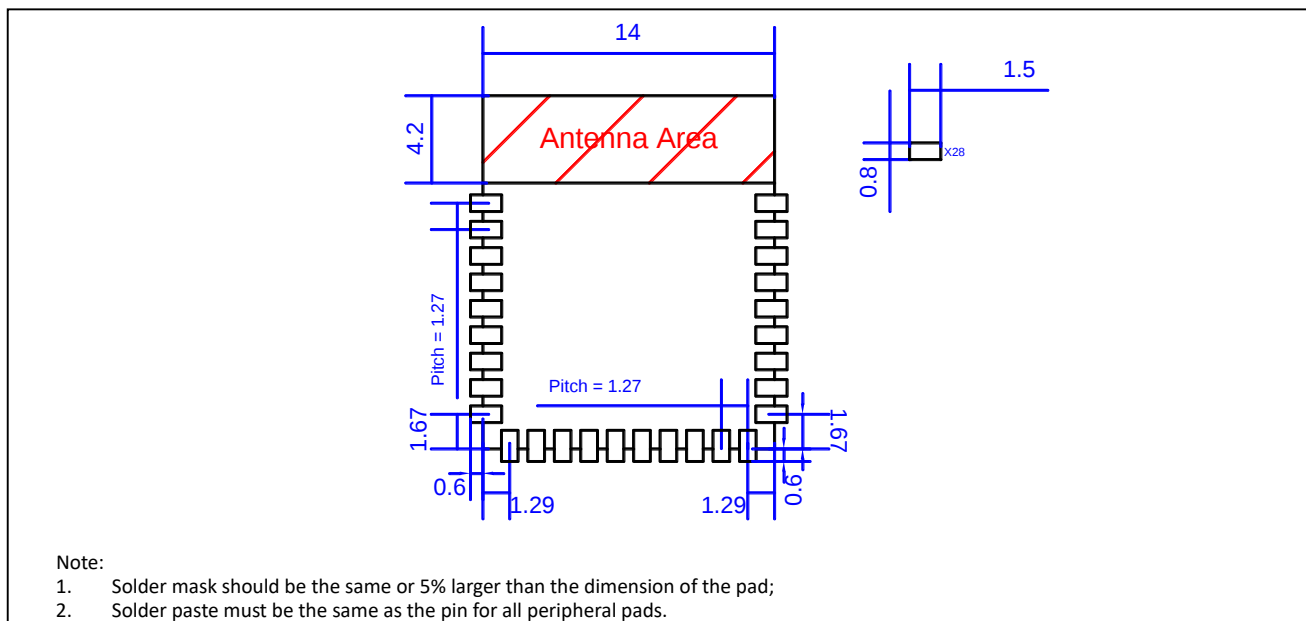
Module Footprint for BDE-MP2755R10 Top View
